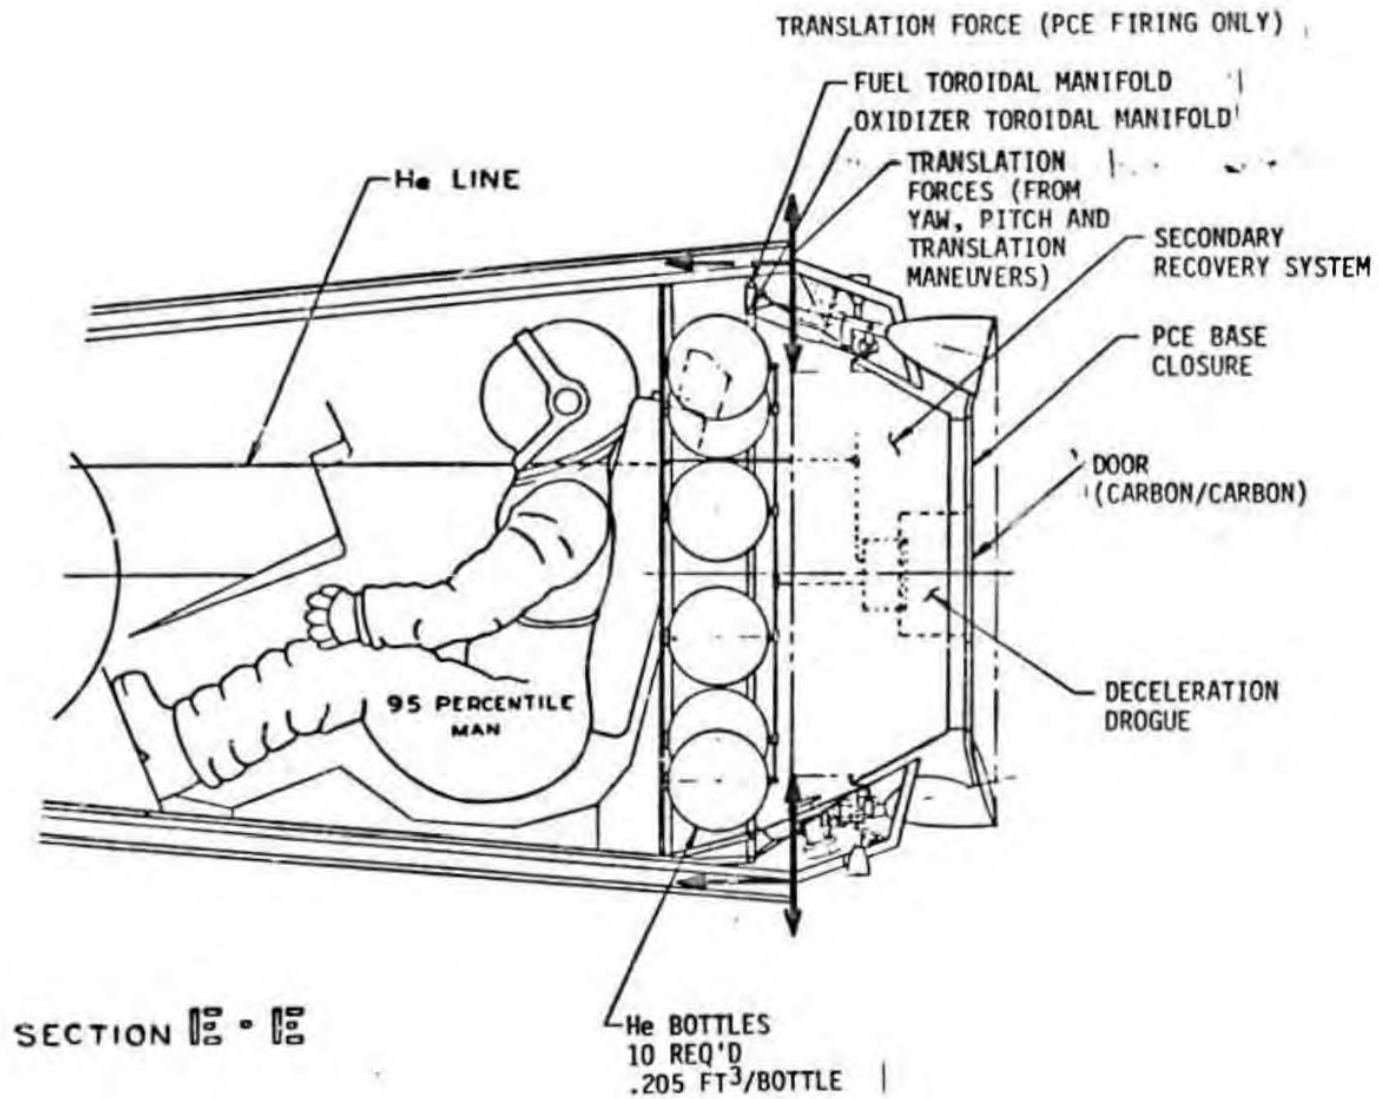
Aft Plug Cluster Engine/RCS Thrust Load Path Definition (Side View)
